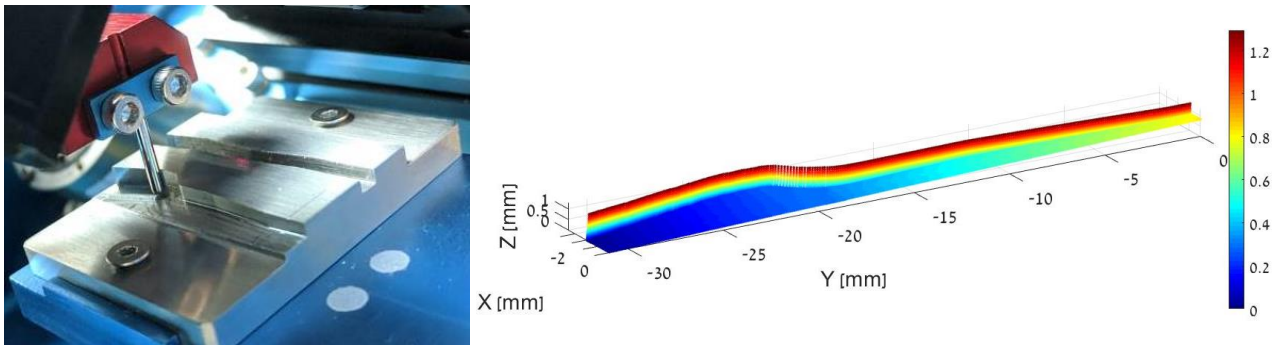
Left: measuring tip next to the steep walled and narrow trench specimen. Right: reconstructed geometry showing both the geometry of the wall and of the inclined bottom surface (3D).
